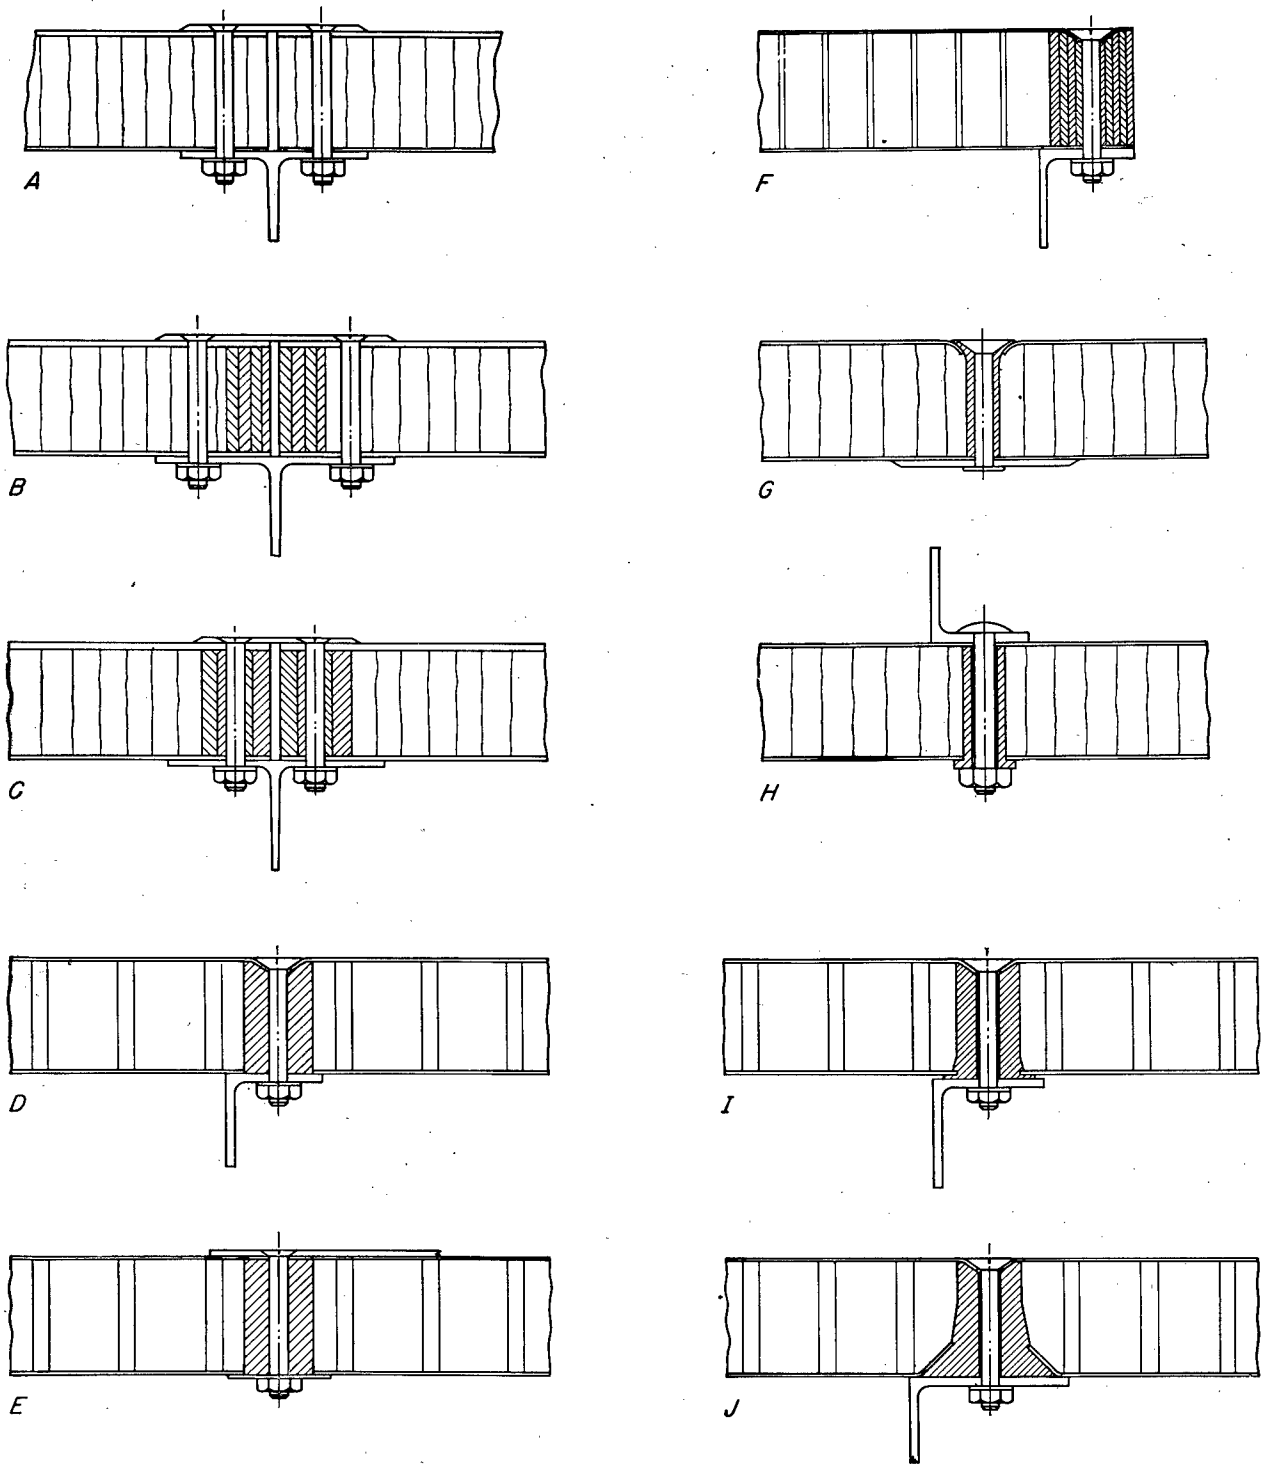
Typical attachment fittings for aluminum-faced parts.
